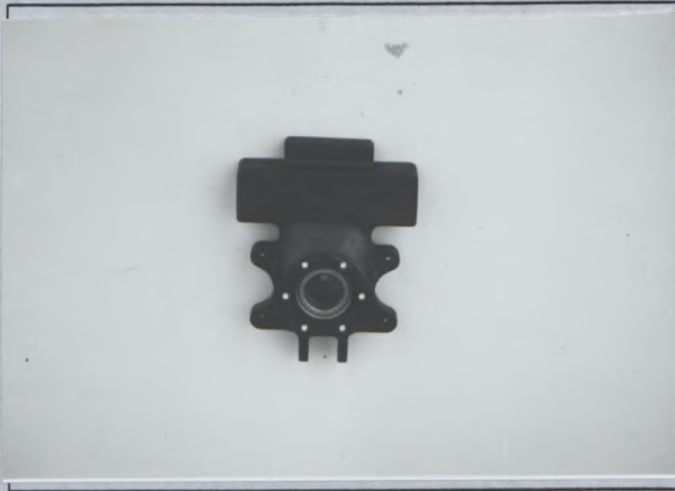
ADJUSTABLE STABILIZER ASSEMBLY
